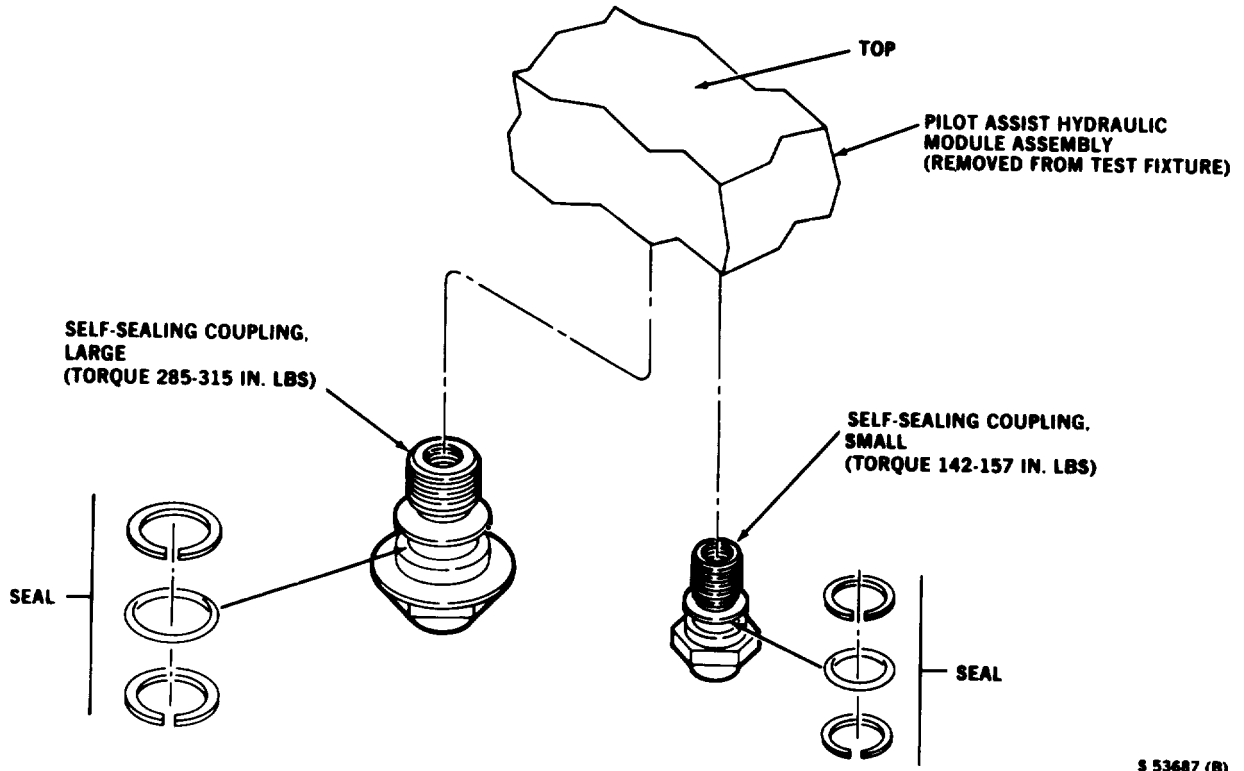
Pilot Assist Hydraulic Module Assembly Removal and Replacement
